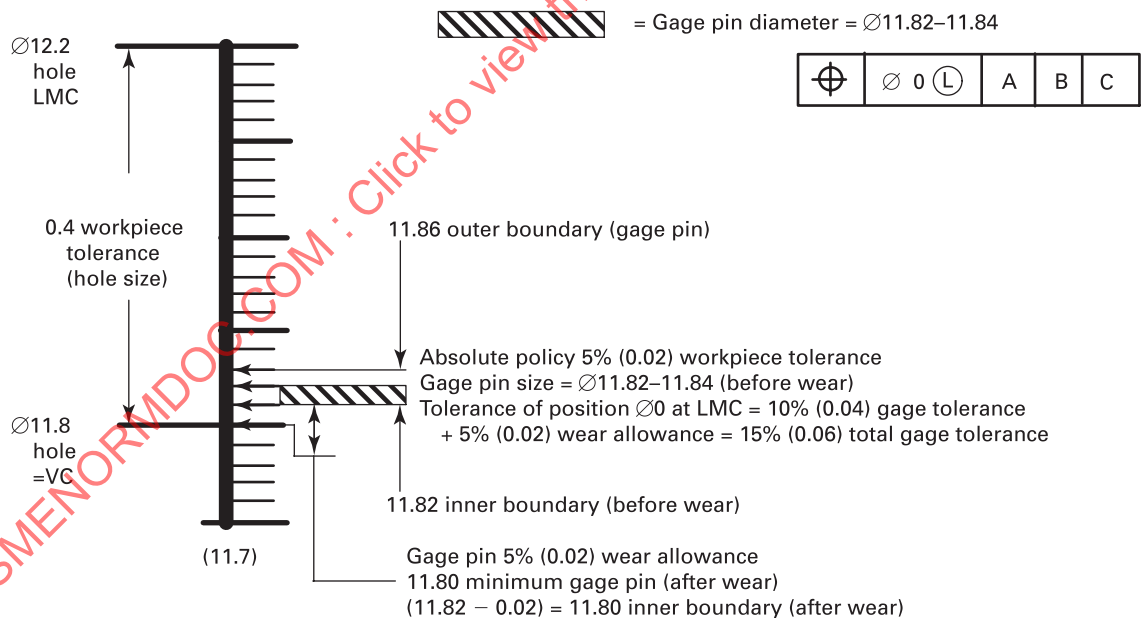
(e) Absolute — Direct Percentage Based Gage Tolerance Method
